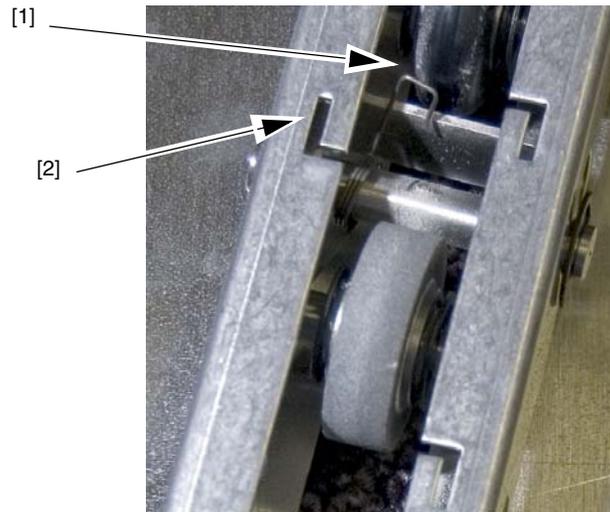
Aligner Roller Torsion Spring Hooked on Bracket.
